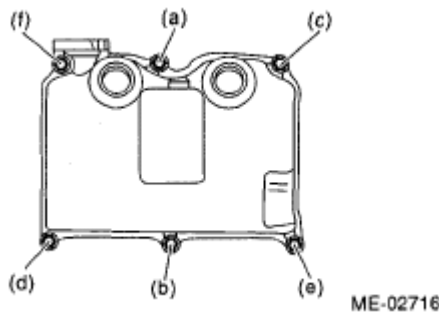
Identifying Rocker Cover Bolts Tightening Sequence - LH Side
